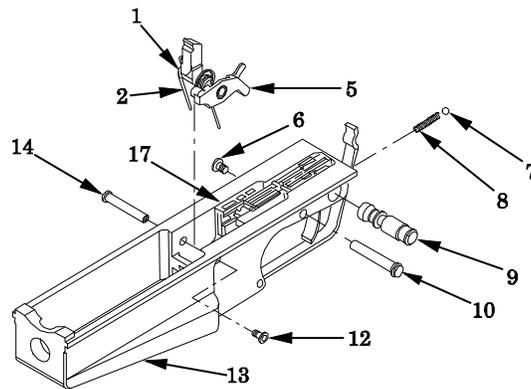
Installation of Hammer Assembly and Safety Mechanism.
